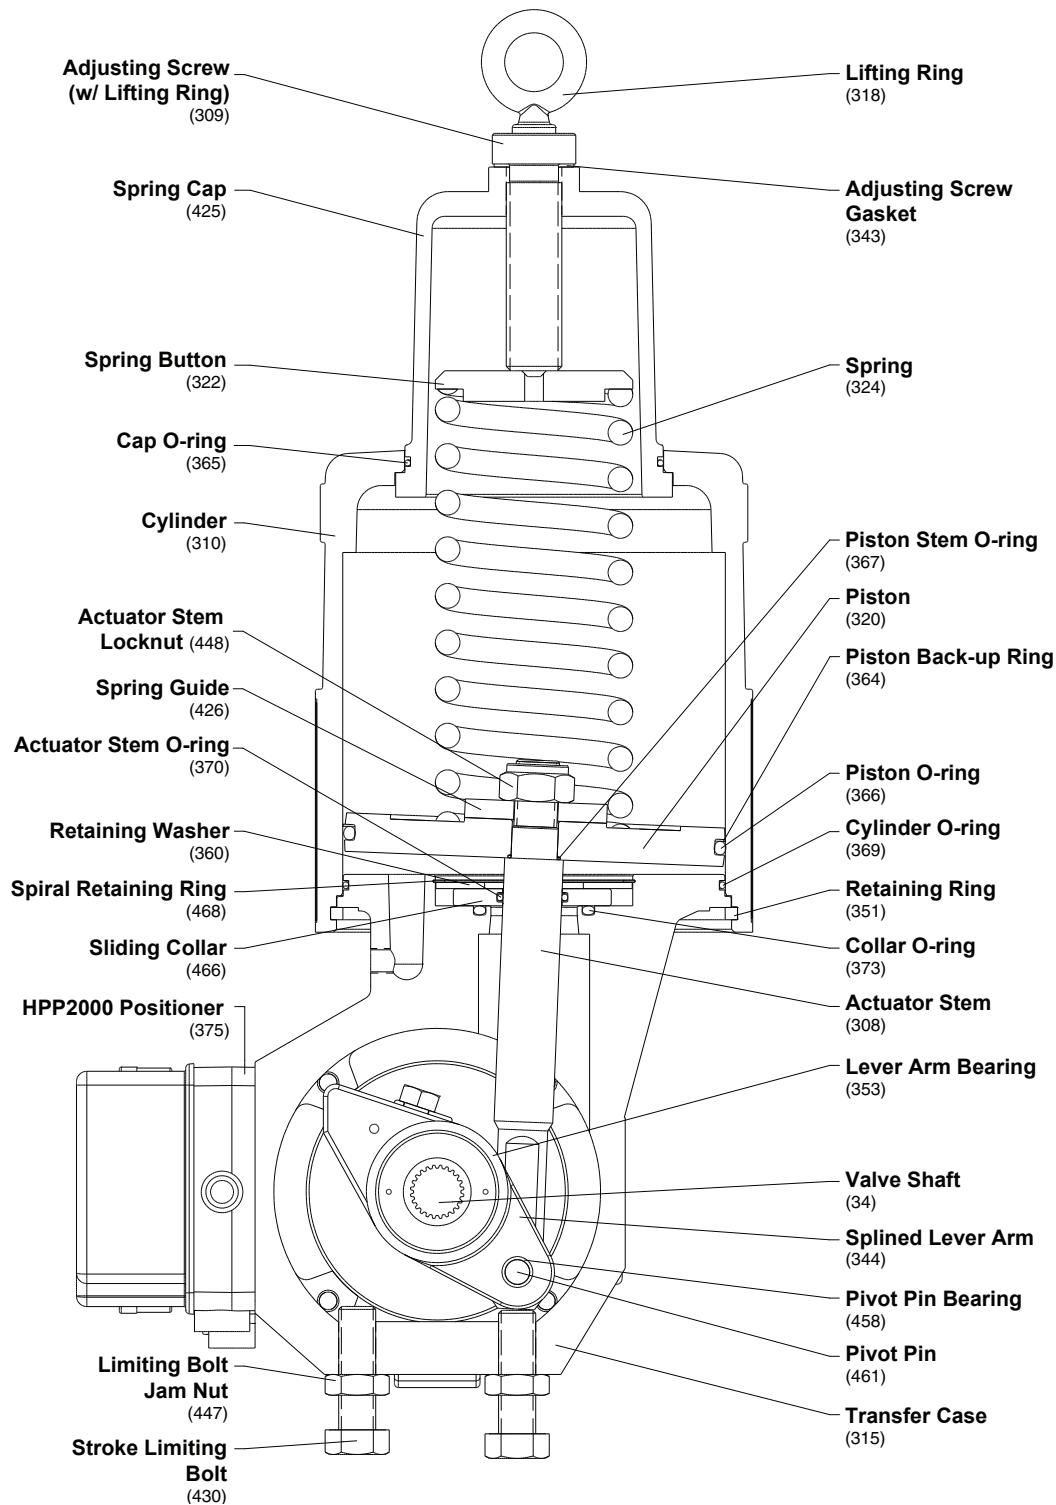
Spring-Cylinder Rotary Actuator with Heavy-Duty Spring
